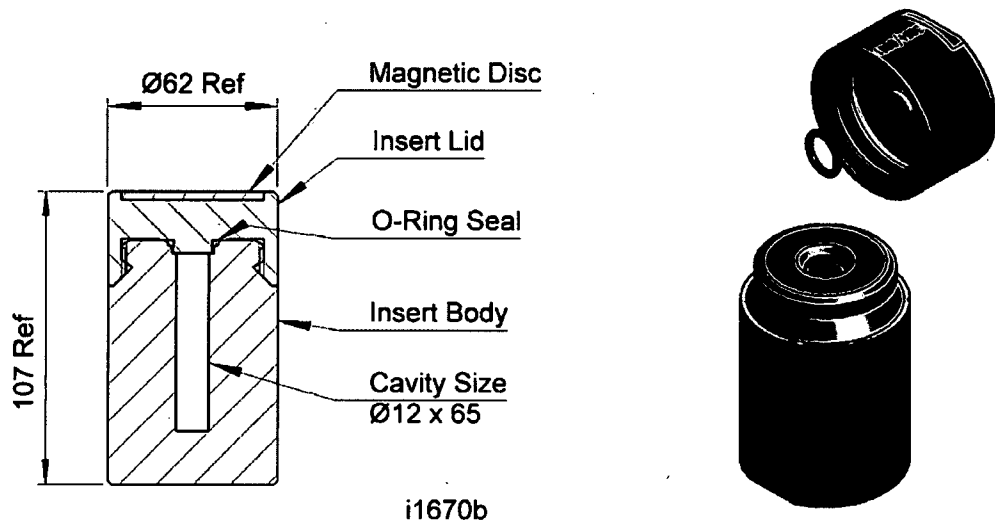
Shielding Insert LS-12x65-Tu, Design No 3984
